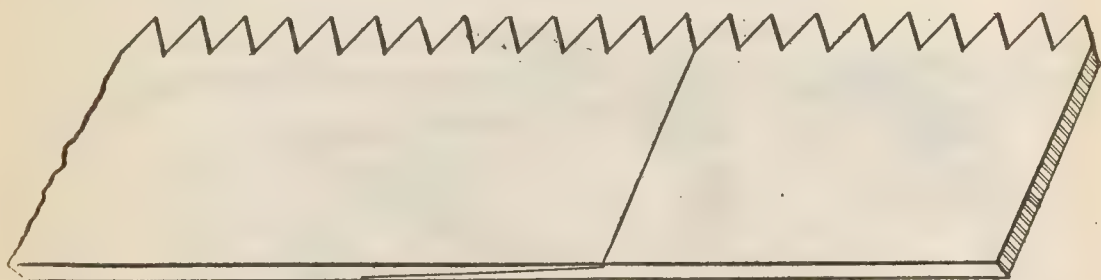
,983.—Lap brazing. A band saw is a good example of this method. In making the lap the two ends are chamfered by filing to make an accurate joint as shown. Silver solder is generally used, it being applied between the two surfaces, or the surfaces are coated with borax and the solder allowed to flow into the joint from the edges. After firmly clamping the parts in position, the solder is laid over the joint, or it may be placed between the two pieces to be united. When the heat is applied, the solder melts and the two pieces must be squeezed tightly together to force out surplus solder. Silver coins contain 10 per cent. of copper and make a good hard solder. When using a coin, pound it until very thin and then place between the two surfaces to be brazed.
